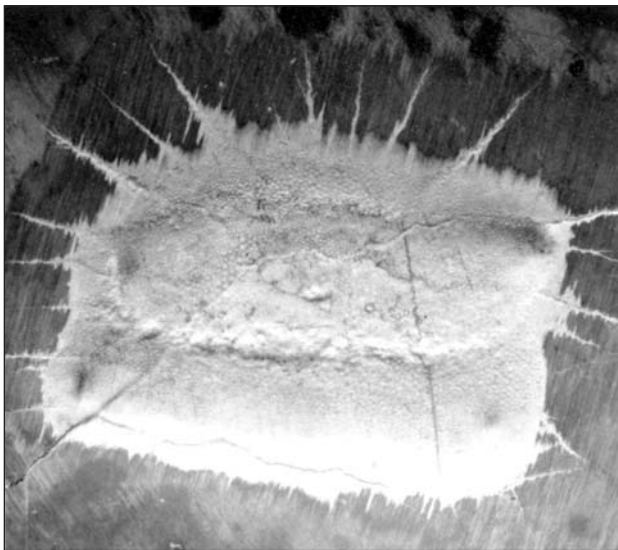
Specimen of silver-brazed INCONEL alloy 718 showing stress-corrosion cracking.
